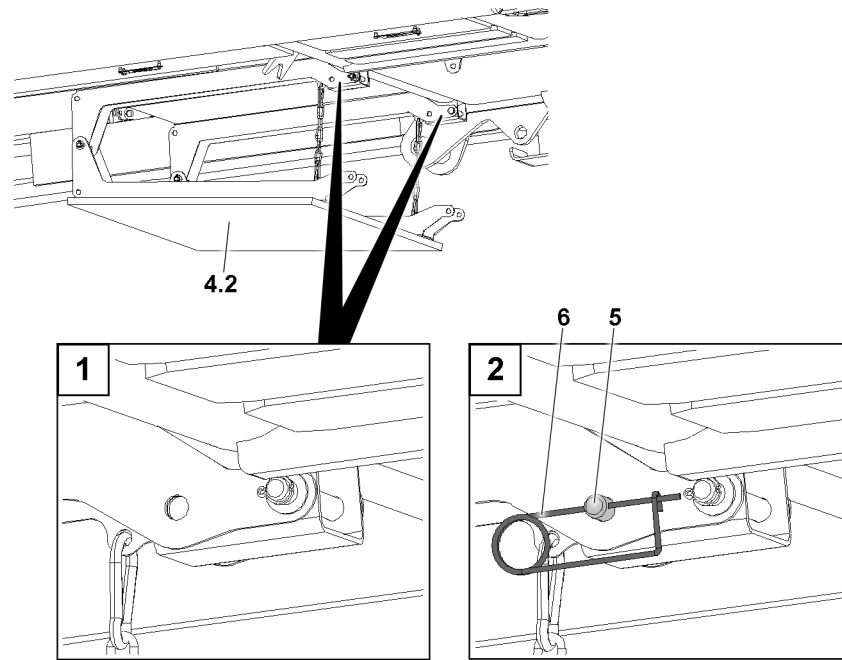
Assembling the assembly pedestal in the operating position — pinning the assembly pedestal in the horizontal position
